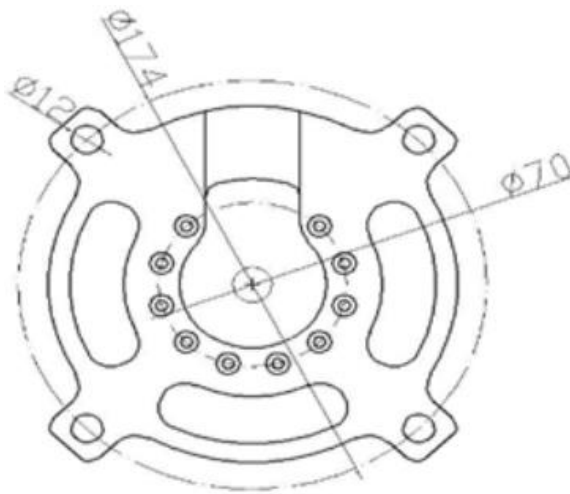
Generator Mounting Dimensions, in Millimeters (Off the Grid Sun, n.d.).
